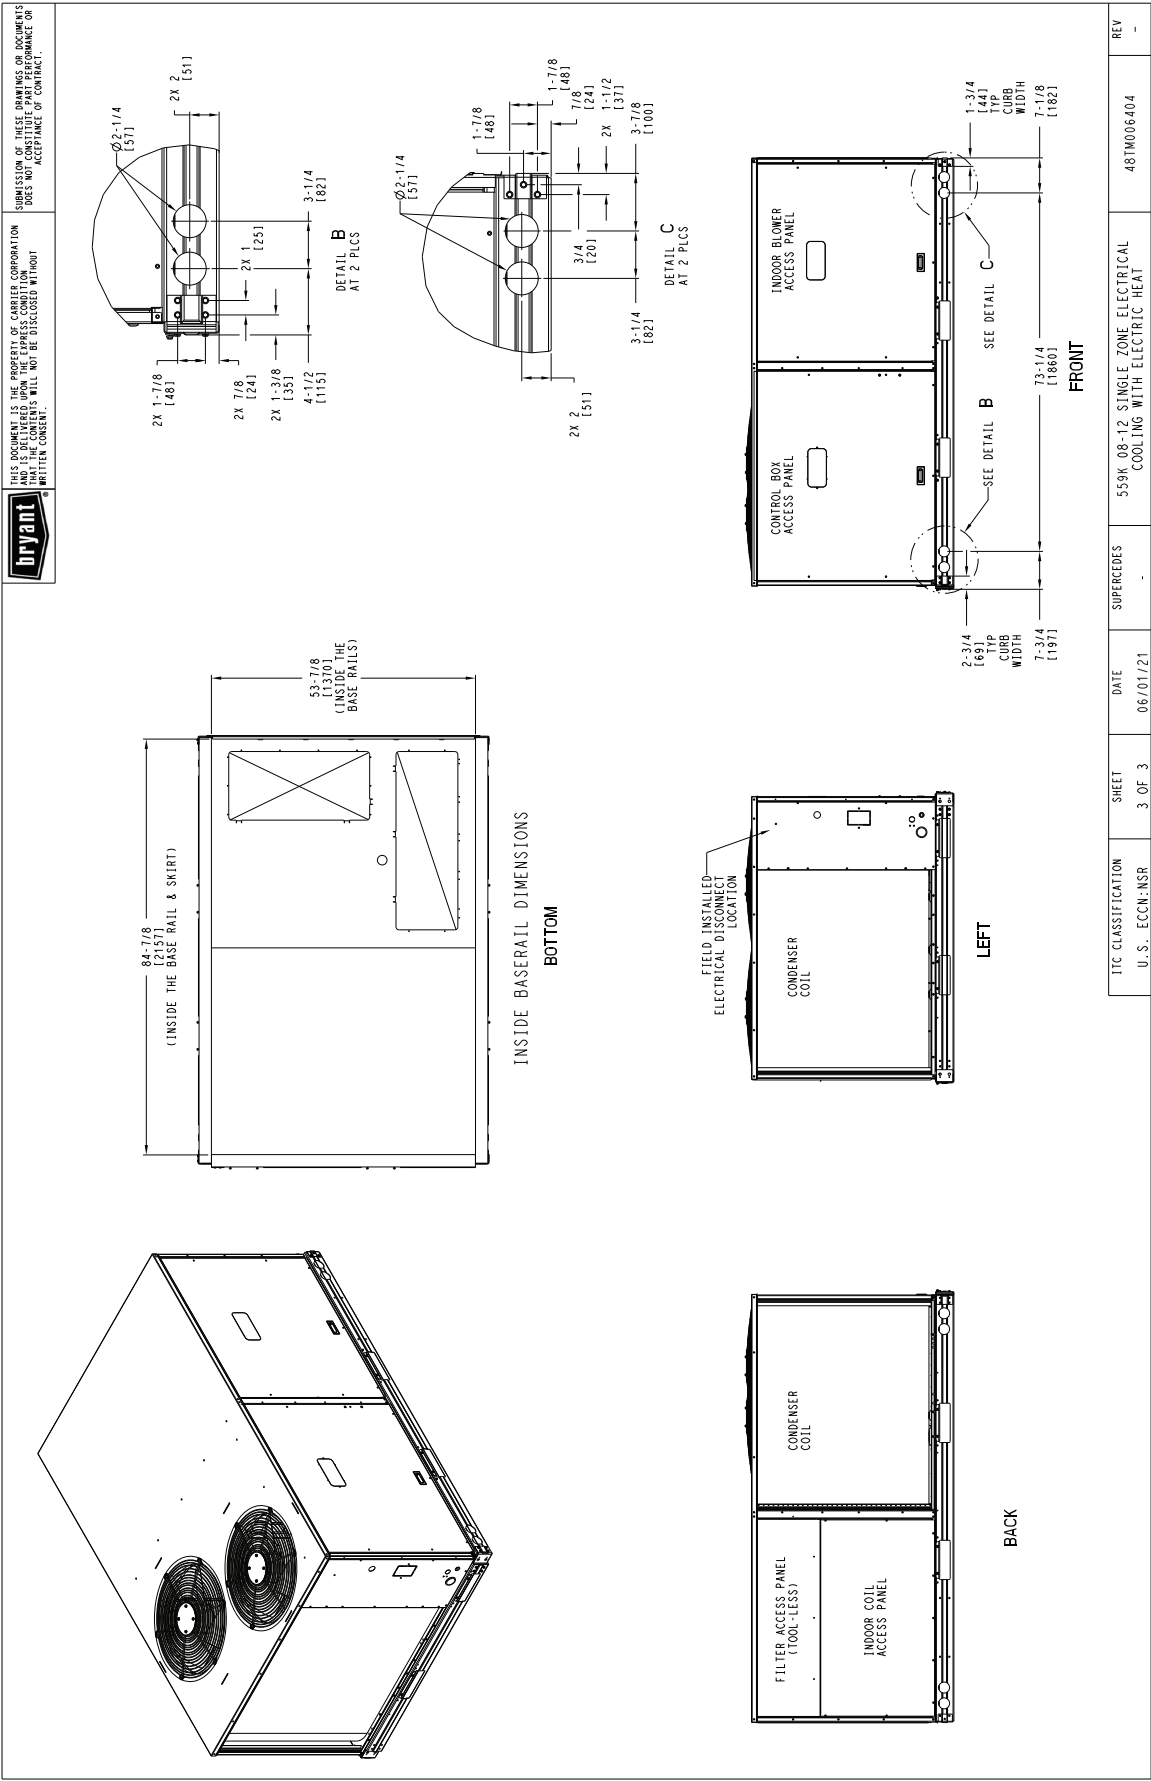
559K08-12 Dimensional Drawing (cont)
